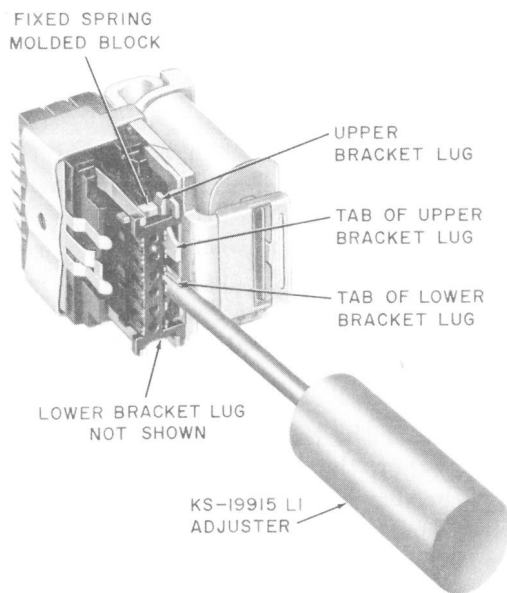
Method of Adjusting Contact Separation (6-Position Relay Shown)
